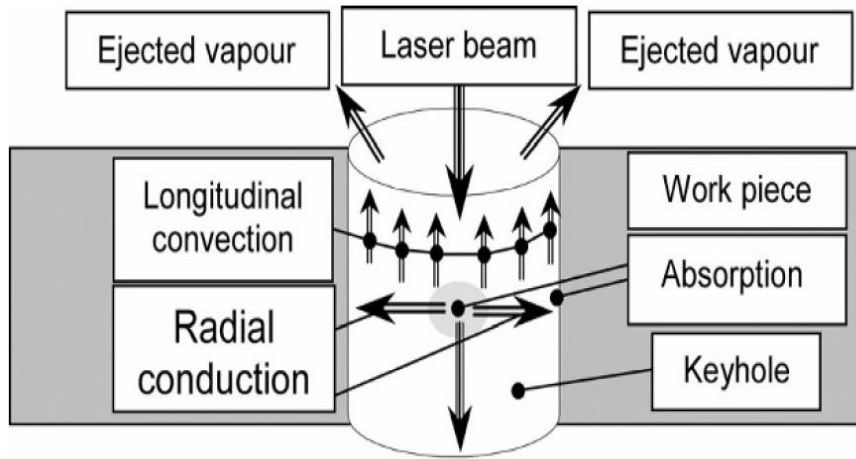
Relative geometry of the work piece, laser and keyhole during laser keyhole welding, and the transfer processes involved.
